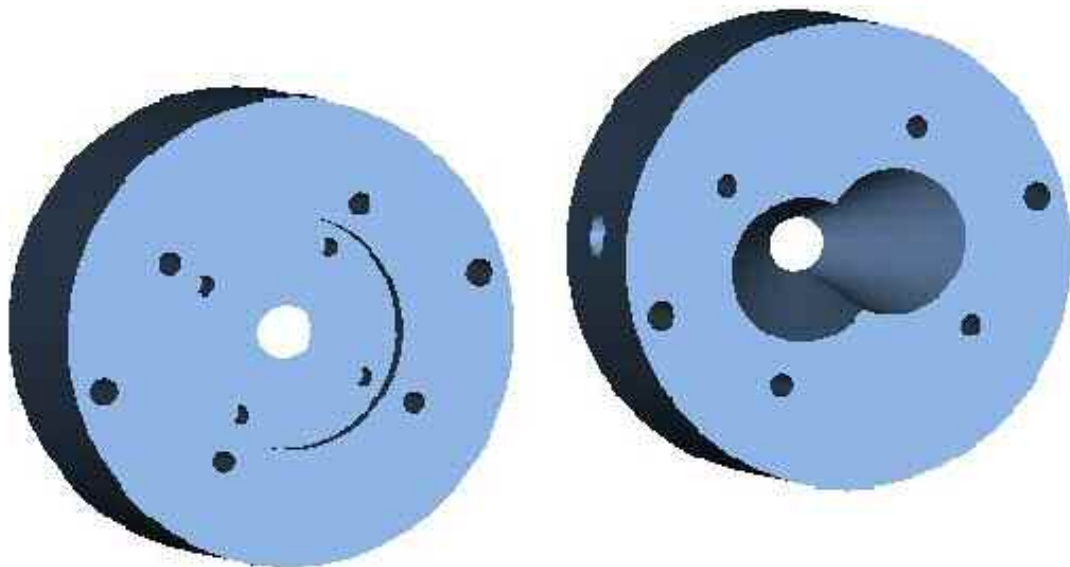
Eight-to-Round Adapter for the New Die Assembly.
